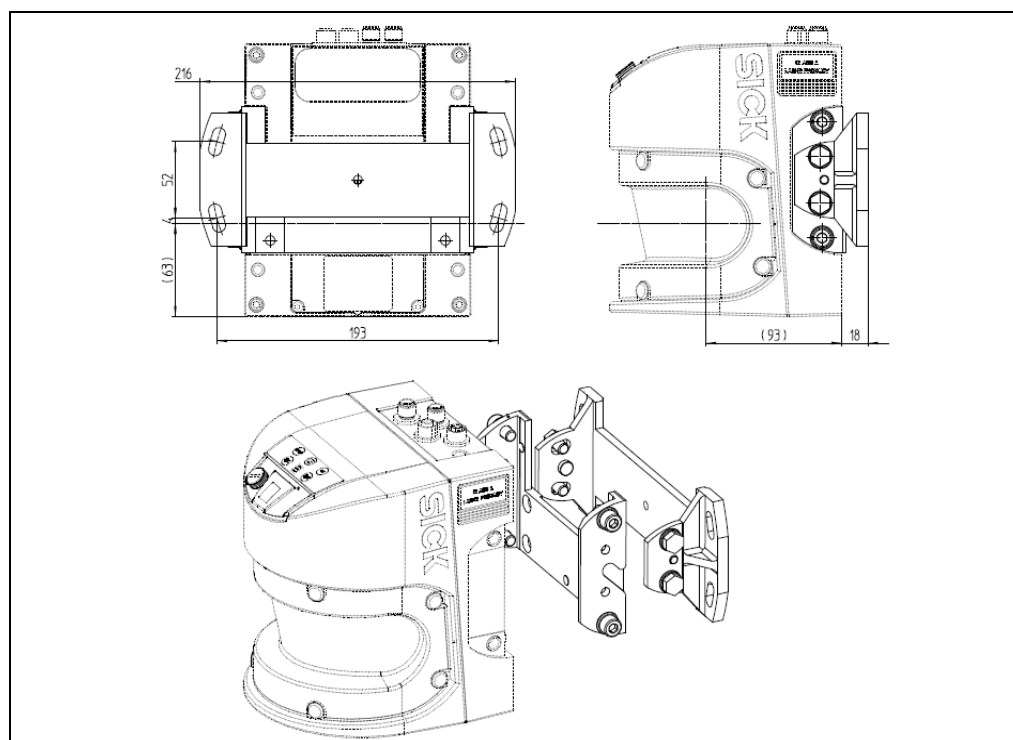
Dimensional drawings of the LMS511 SE with mounting kits 1 and 2
